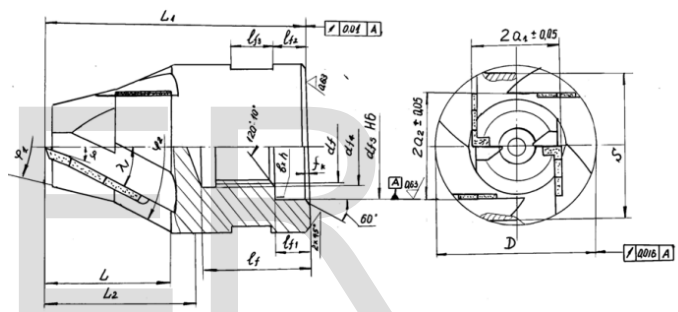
Parametric drawing of a workpiece from a improved modular end mill cutter with hard-blade insert
